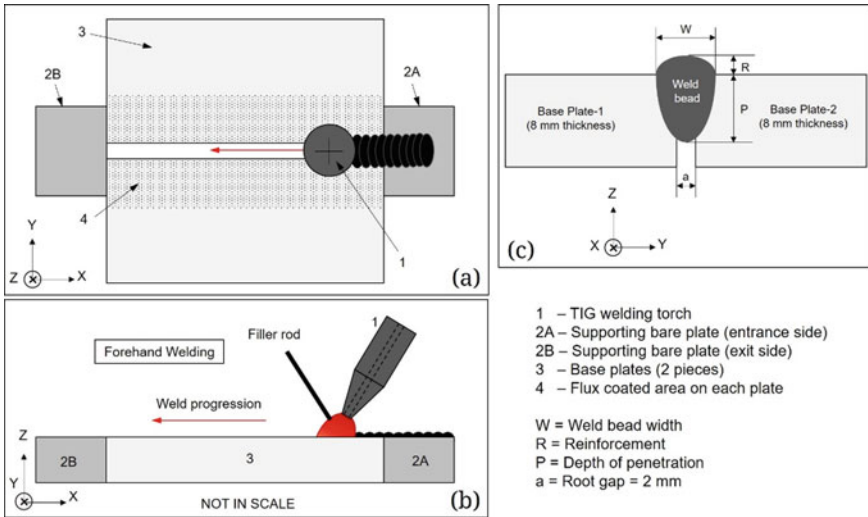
Schematic representation of the forehand A-TIG welding setup in a top view, b side view, and c cross-sectional view [7]
